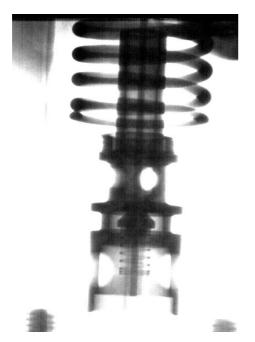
Lower Pressure Relief Valve, control assembly x-ray.
